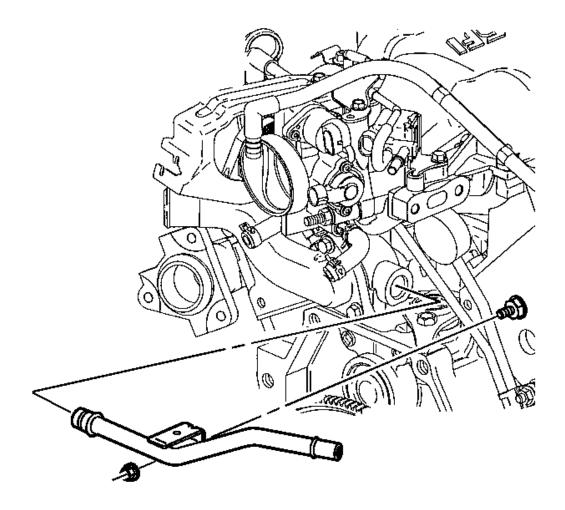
View Of Heater Inlet Pipe & Nut Courtesy of GENERAL MOTORS CORP.
